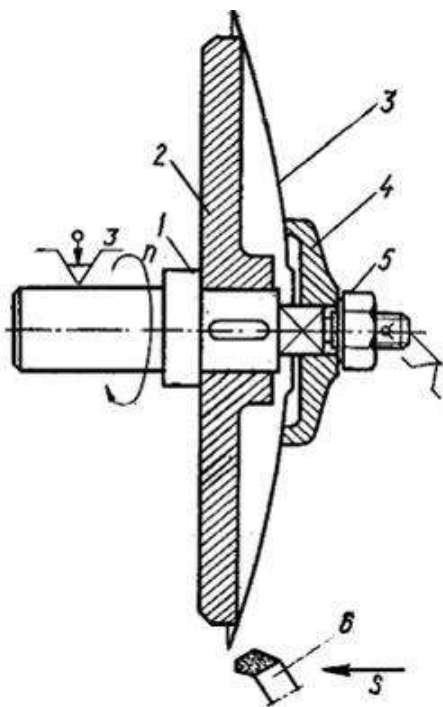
Scheme of turning of disk dull blade: 1 – mandrel; 2 – facing head; 3 – disk; 4 – washer; 5 – nut; 6 – cutter
